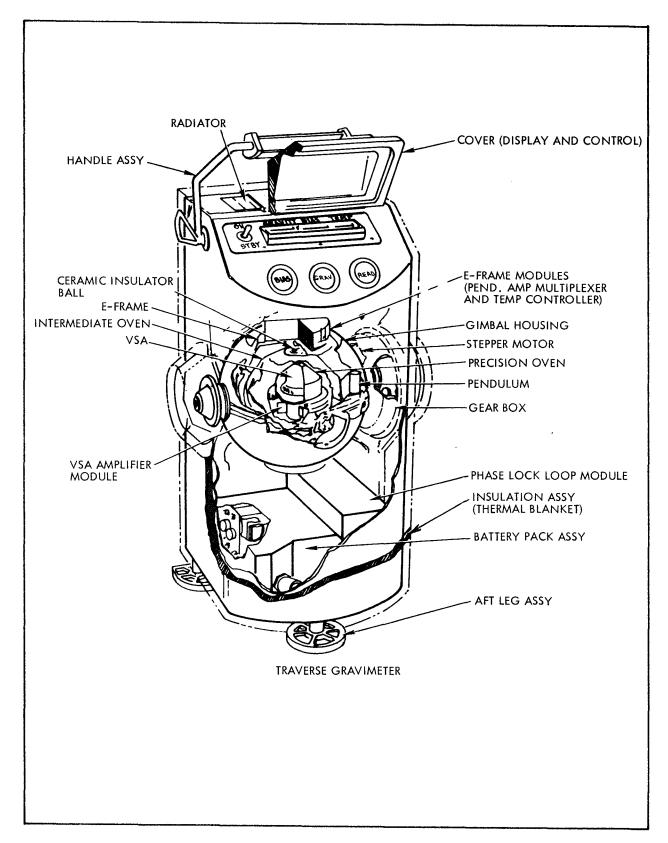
(a). Traverse Gravimeter Experiment - Detailed Drawing
